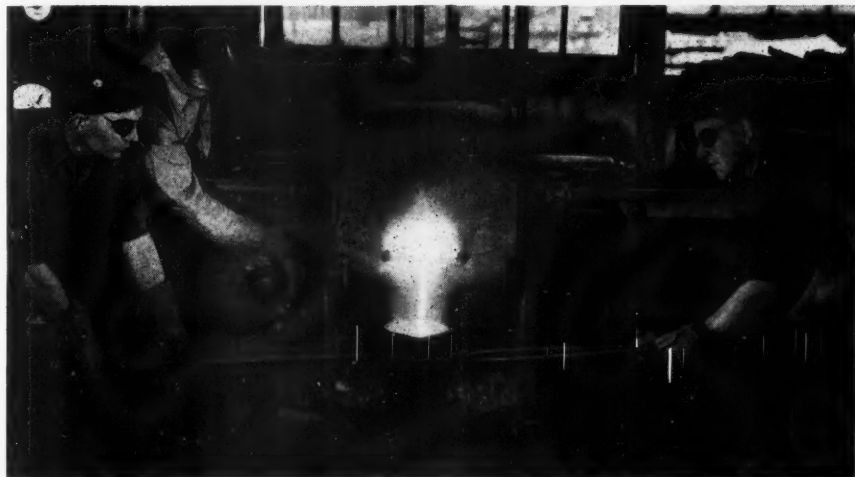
The electric furnace shown here is used to salvage scrap high speed steel. As many as four heats are run per day, three days a week, salvaging approximately 80 lb. of steel per heat.
